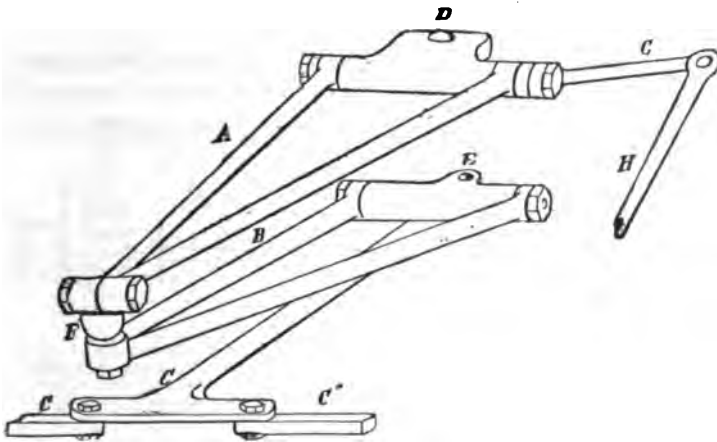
The De Dion & Bouton Spring Compensating Steering Device. The V-shaped piece A, constructed of two pieces, as shown, is attached to the tubular front cross-piece of the body frame at D, and pivoted on the ball joint at F, to the lower V-shaped piece, B. This is also pivoted at F, and is attached to the axle tree at E. The T-piece, C, is also pivoted at E rigidly with B, so as to turn sideways with it. It carries the links C' and C'', which actuate the steering arms of the two stud axles. The link, H, is attached to the arm, G, and when moved forward or back by the worm gear and pinion arrangement at the base of the steering-wheel pillar, moves the entire structure. A, B and C, on the pivots, D and E, to the right or left, as desired. The object of the device is to allow of a certain up and down movement, as the springs yield, without disarranging the steering gear or vibrating the steer wheel. In such cases the V-pieces, A and B, move on the ball joint F, thus permitting the pivots, D and E, to be approached and separated, as the springs move.
